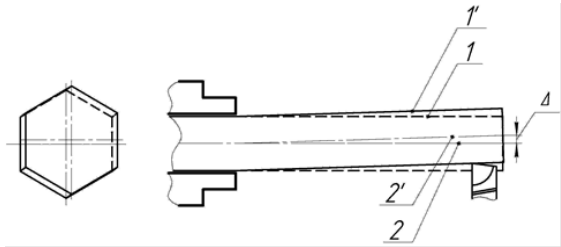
The treatment scheme of workpiece while lathe turning by one cutter.
